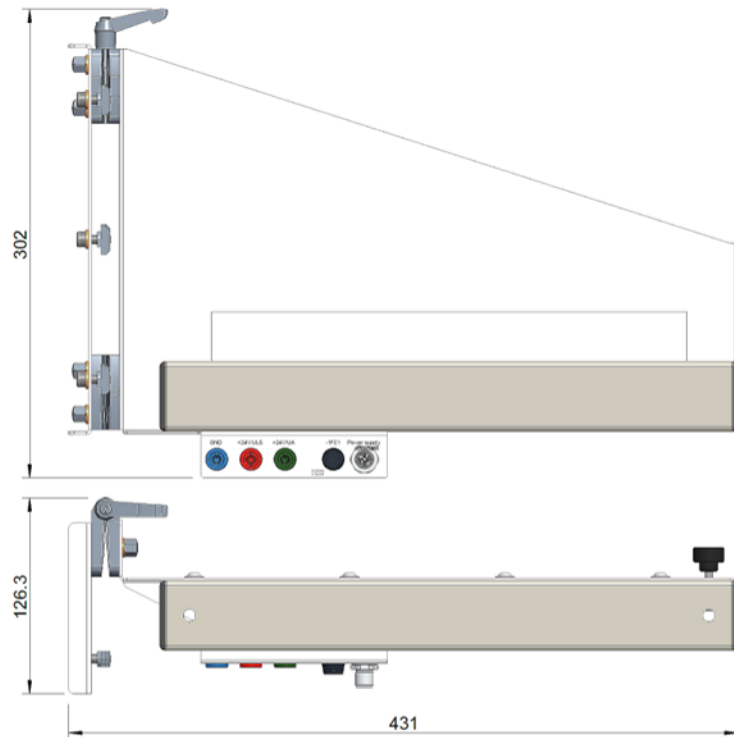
Dimension sheet of the basic module TS-AC B2-M1-1X (in mm)
